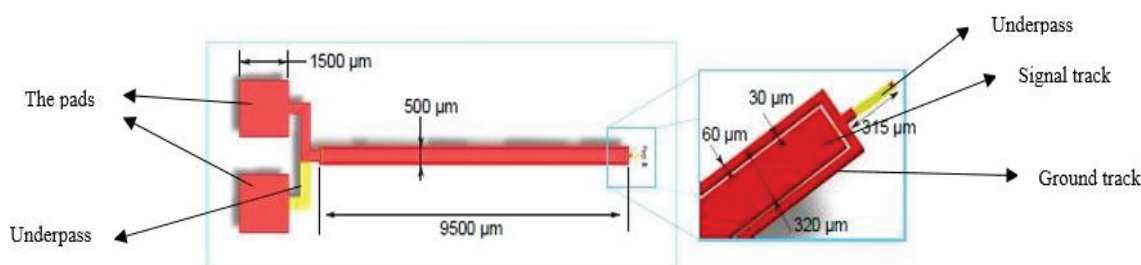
Design and dimensions of the 2nd prototype of the micro-probe [80]
